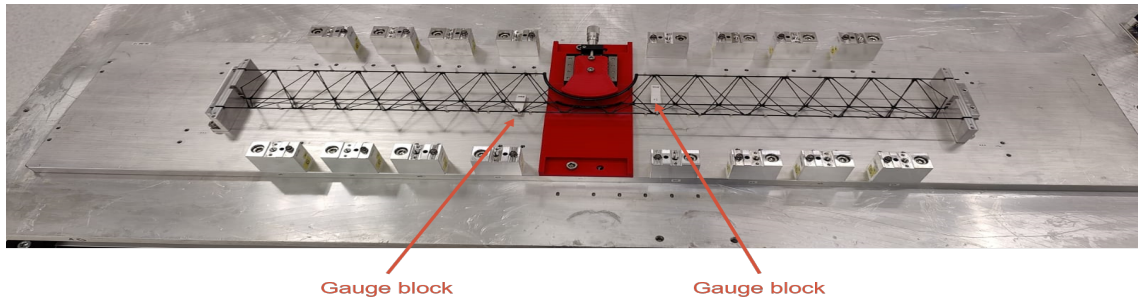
Assembly of prototype of central ladder using specific designed tools and gauge blocks to avoid sagging in the ladder during the assembly
